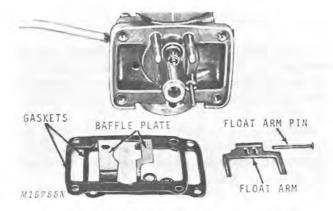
Removing Float Arm Assembly and Baffle Plate
